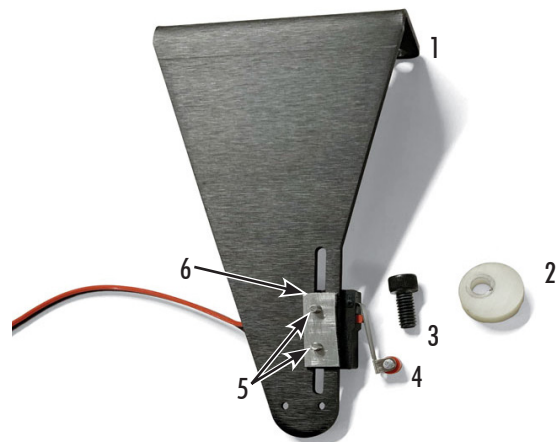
Z-axis limit switch parts, clockwise from top:
